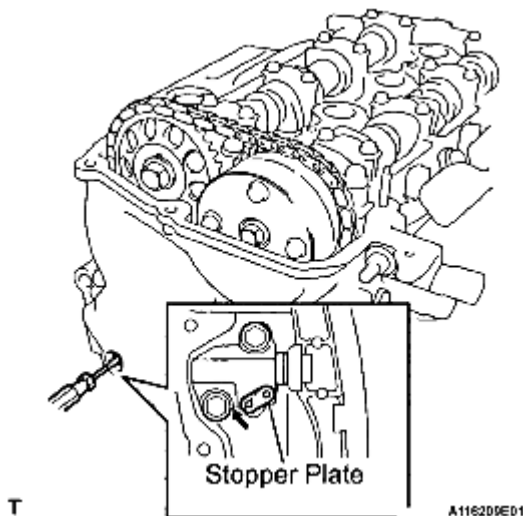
Identifying Stopper Plate Of Chain Tensioner
